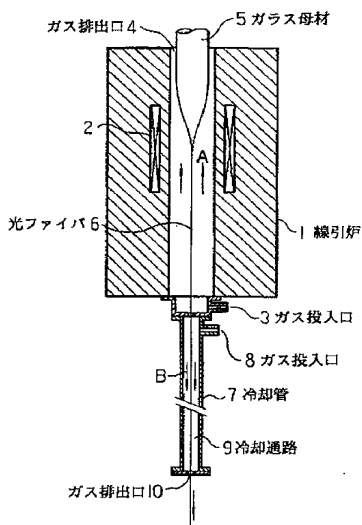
Explanatory drawing showing the manufacture method of an optical fiber and the gestalt of operation of a manufacturing installation by this invention.
